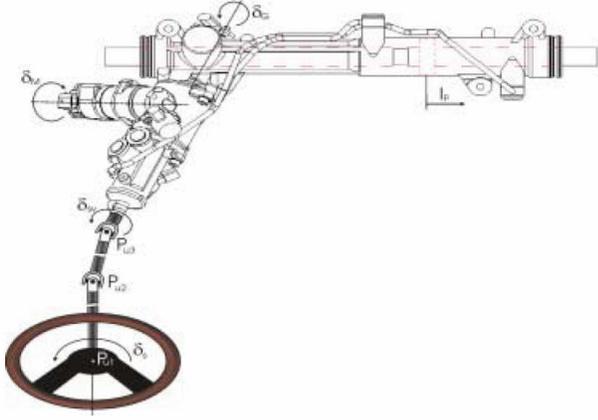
AFS system including (top-down) steering rack, actuator (motor and planetary gear), steering column and hand steering wheel.
